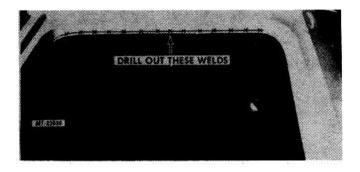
Side Panel to Roof Inner Panel Spot Welds
